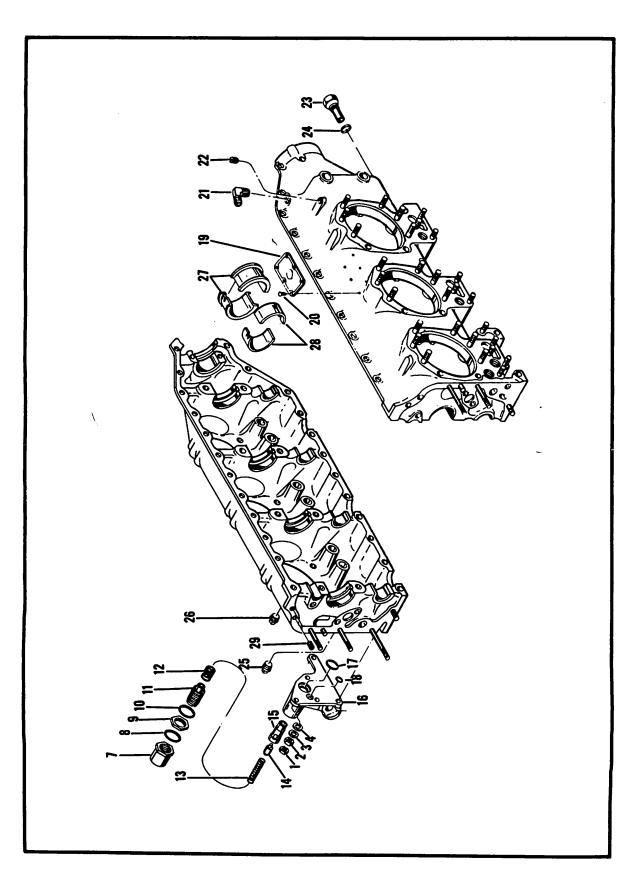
Main Bearings and Oil Relief Valve - Crankcase
